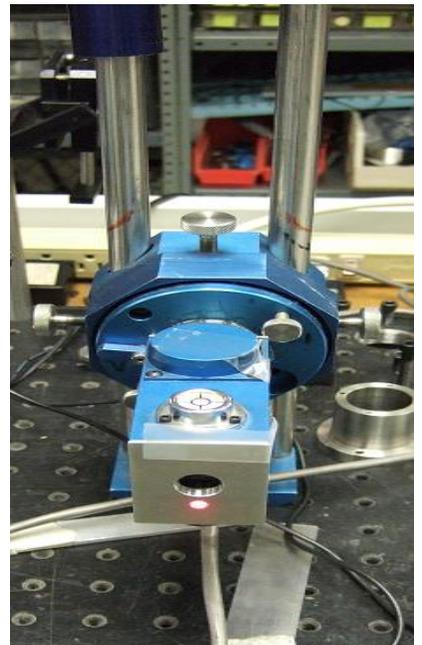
Step 3: Target in P-403 Mounting Fixture
